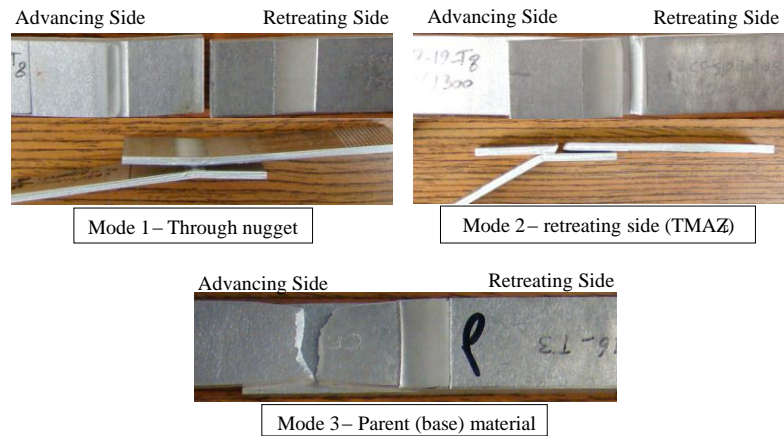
Separation location in FSW lap weld specimens: Mode 1—through the nugget, Mode 2—retreating-side top sheet (TMAZ), and Mode 3—base material.
